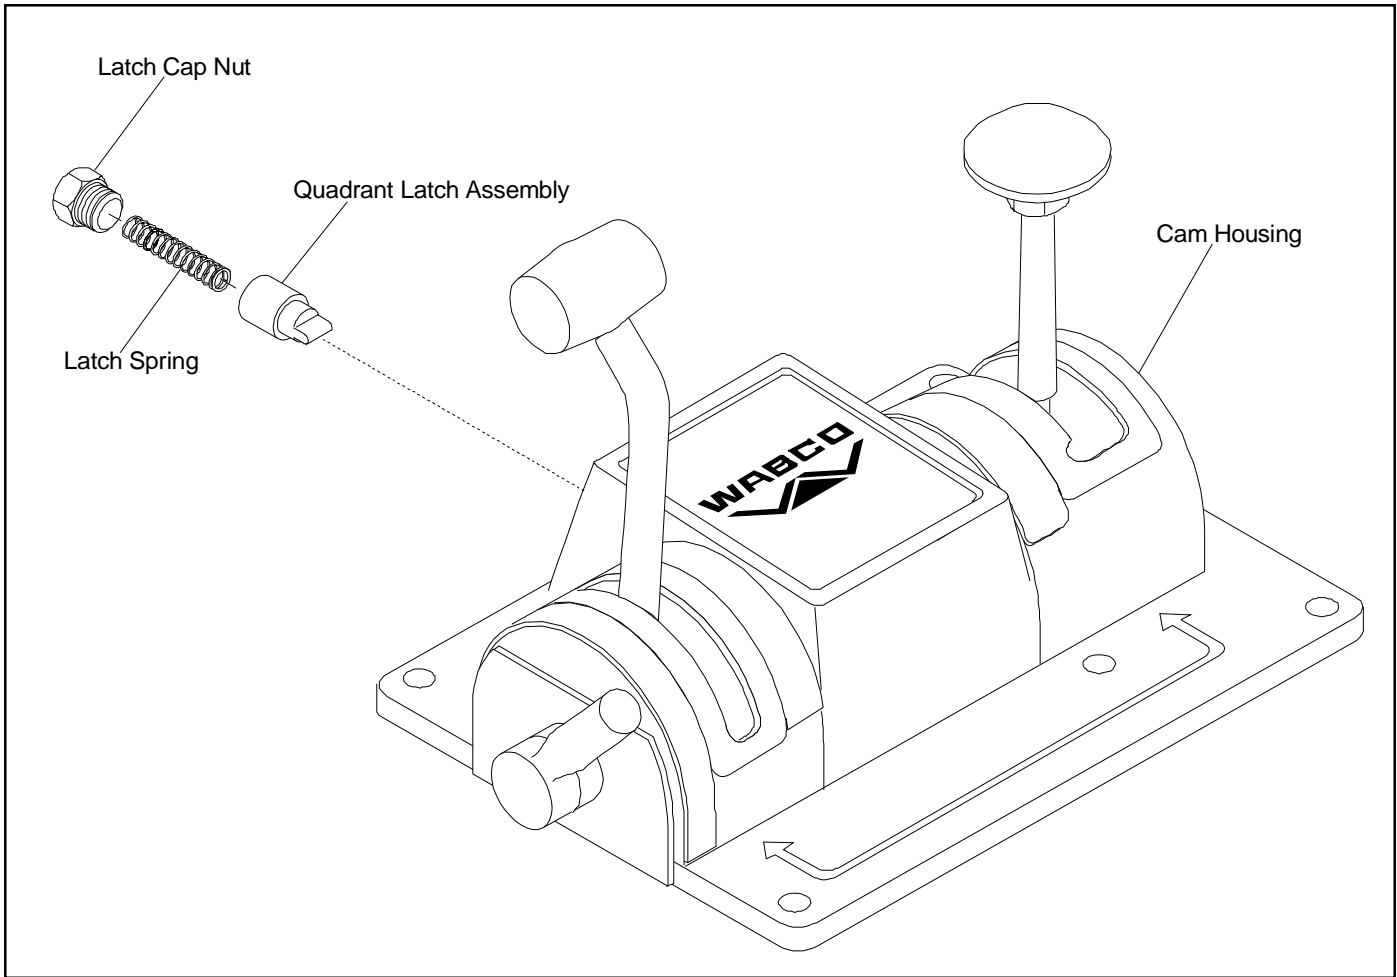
Assembly View for the 30 Type CDW Brake Valve Quadrant Latch
